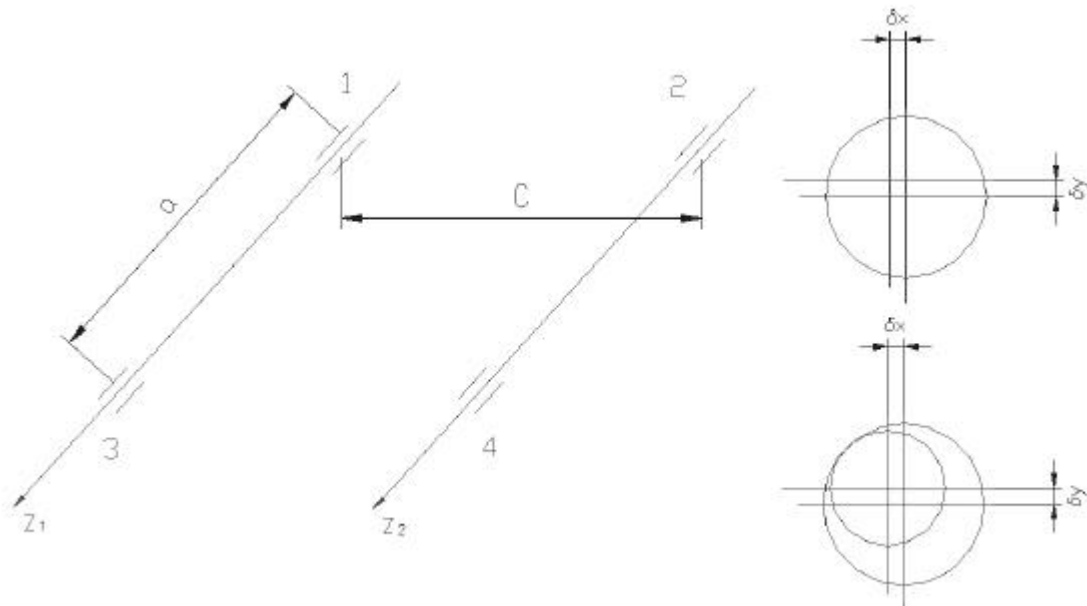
Rotor shafts in the compressor housing and displacement in bearings
